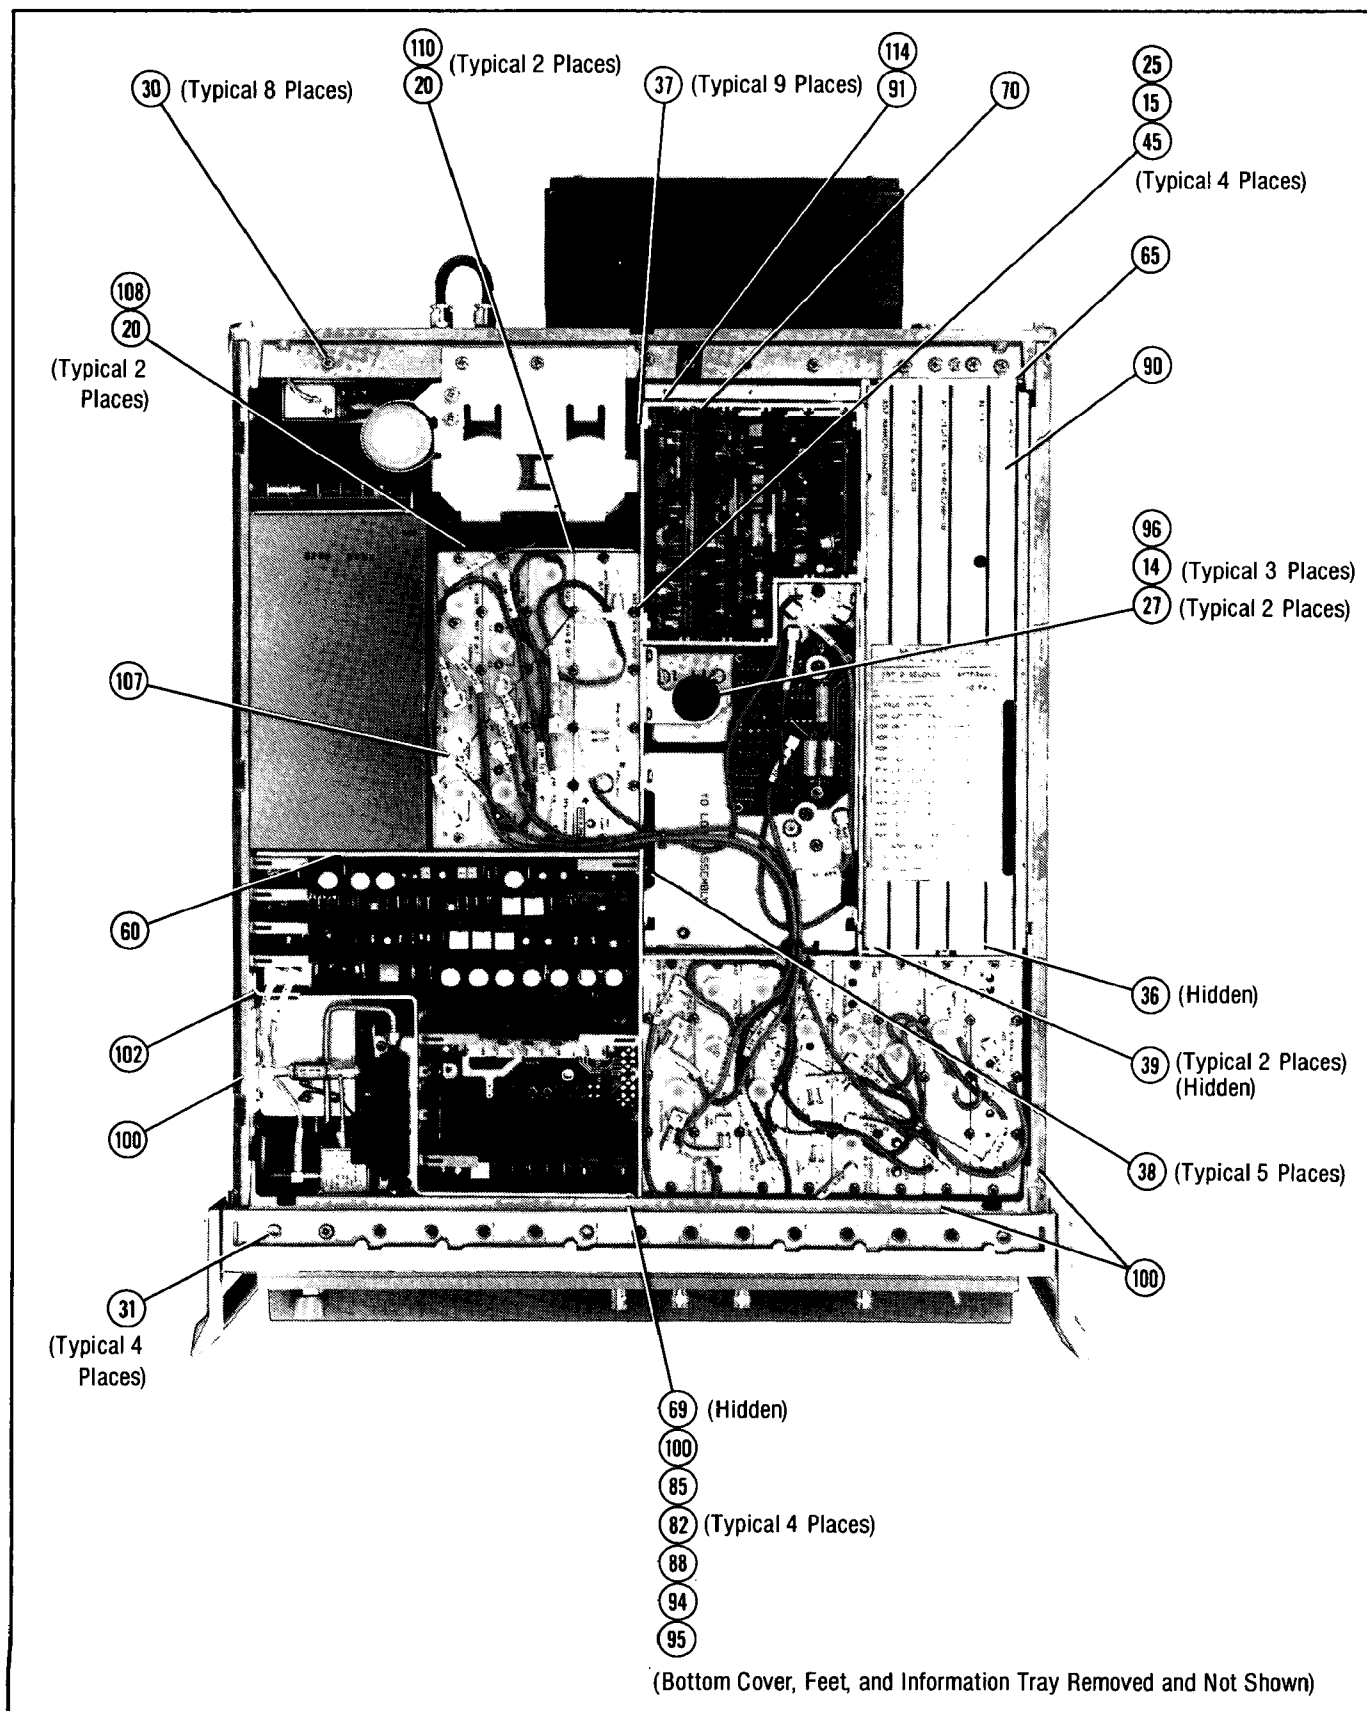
Miscellaneous Mechanical & Chassis Parts (7 of 9)
